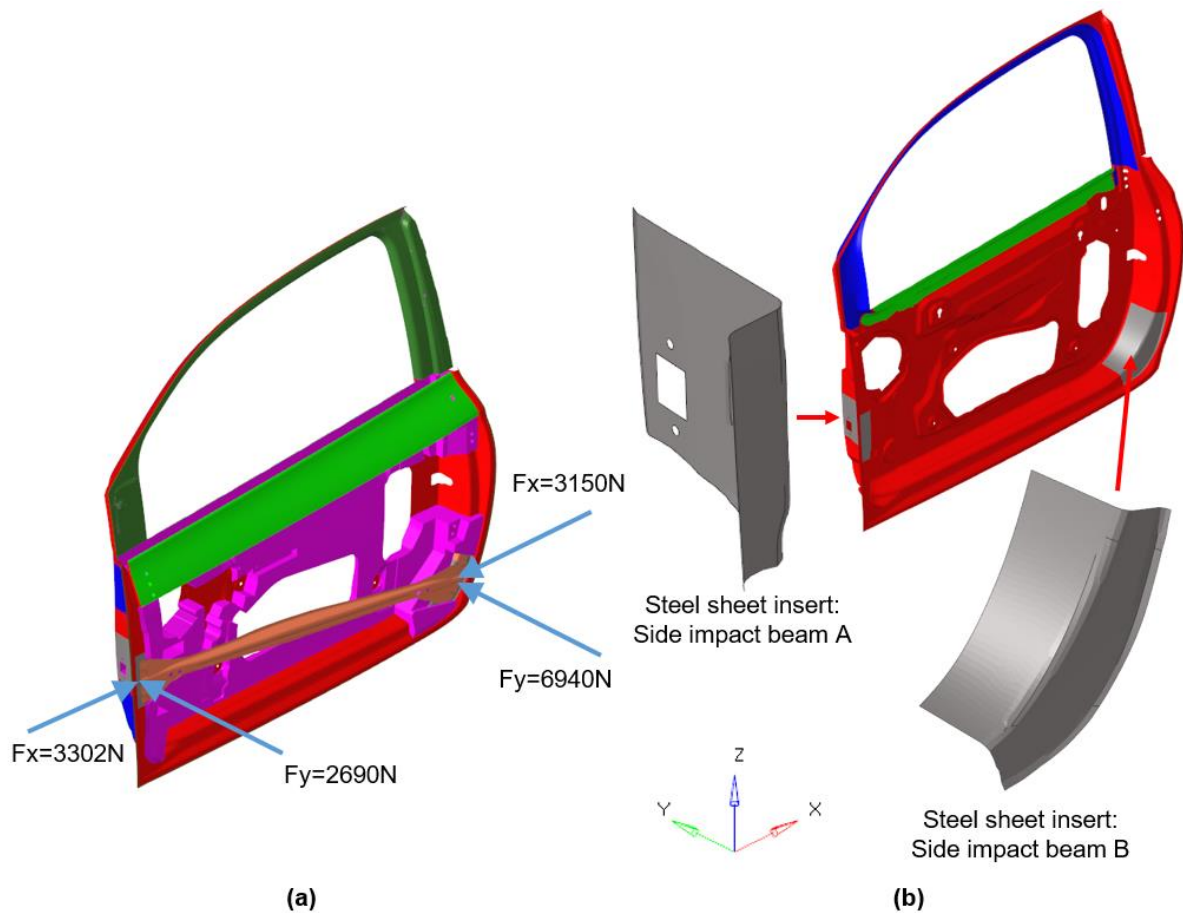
Concept 2: substituted crash loading case (a); steel sheet inserts on the inner panel (b)
